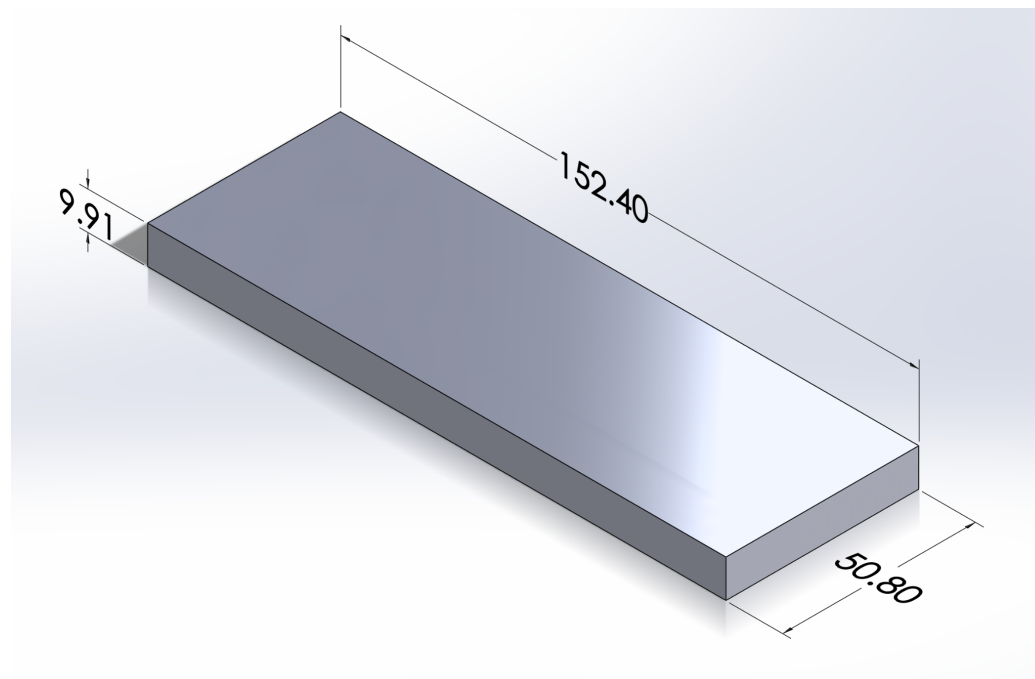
Heel Plate for the footplate. Dimensions are in mm.
